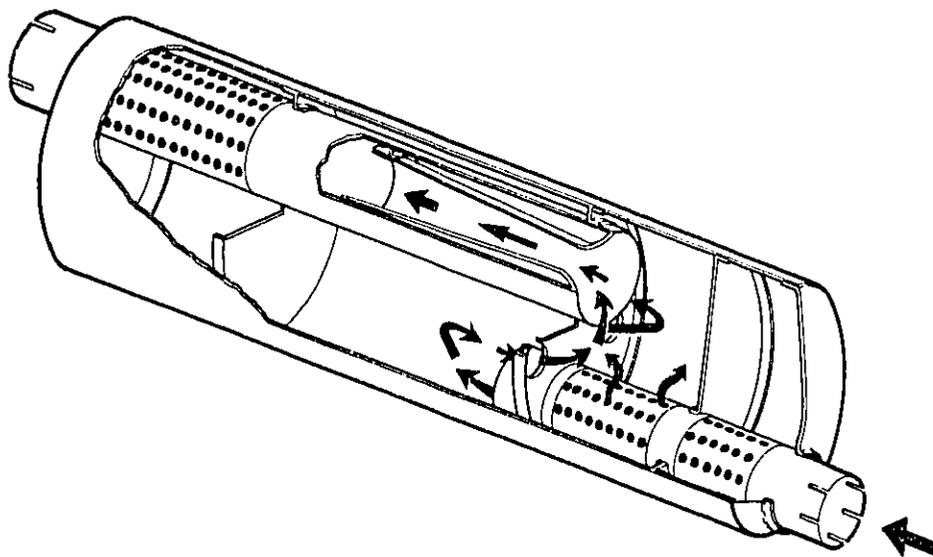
CUTAWAY VIEW OF 10- x 15-IN. ELLIPTICAL MUFFLER.
